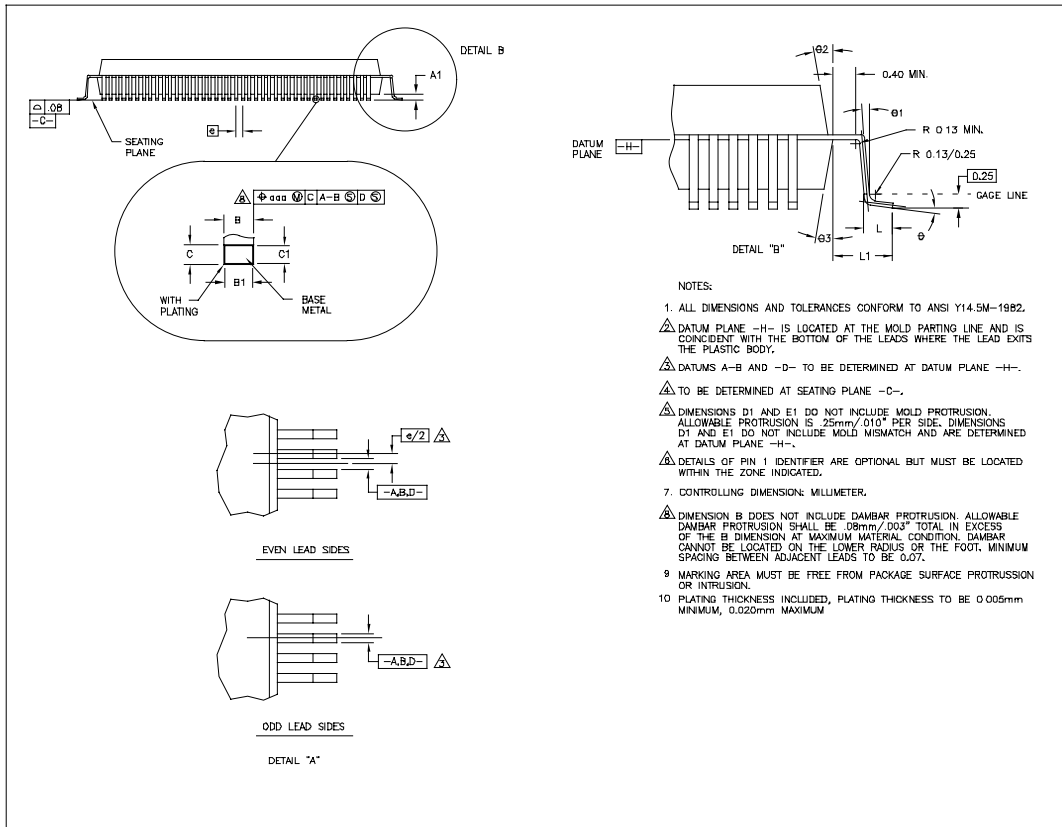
shows the mechanical drawing for the L64780 160-pin PQFP.
